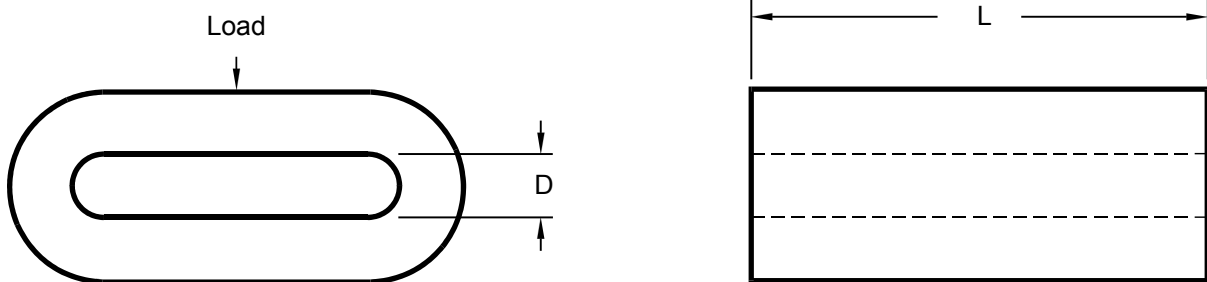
Deformed Specimen of Vacuum Brake Hose
